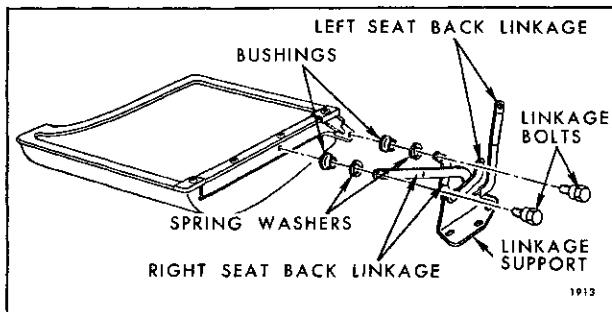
Folding Second Seat Back Inner Linkage and Support
